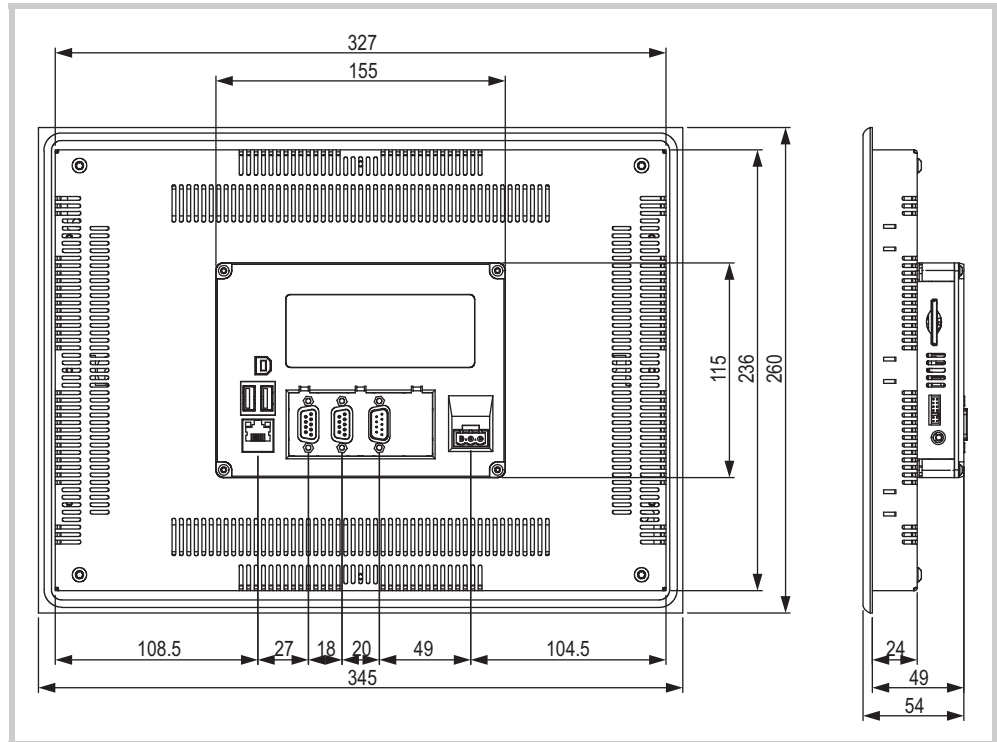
Mechanical dimensions of the 10.4" devices in mm
